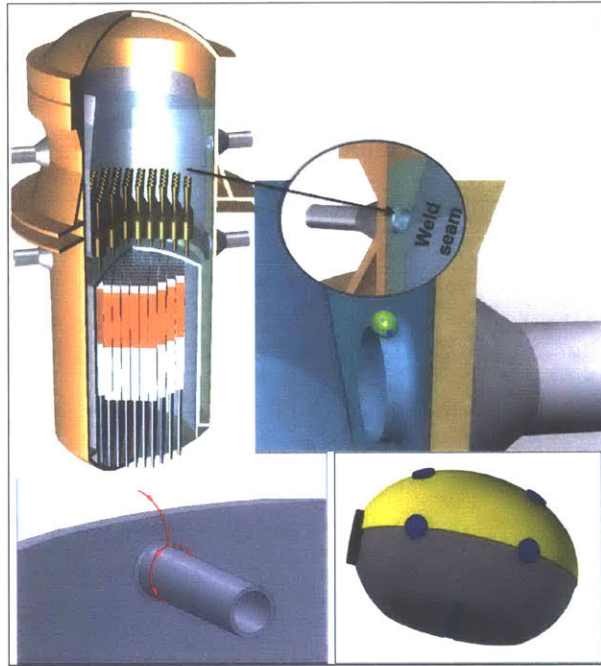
A picture demonstrating a concept case of weld seam inspection of a BWR tank with a micro UUV moving on the submerged surface
